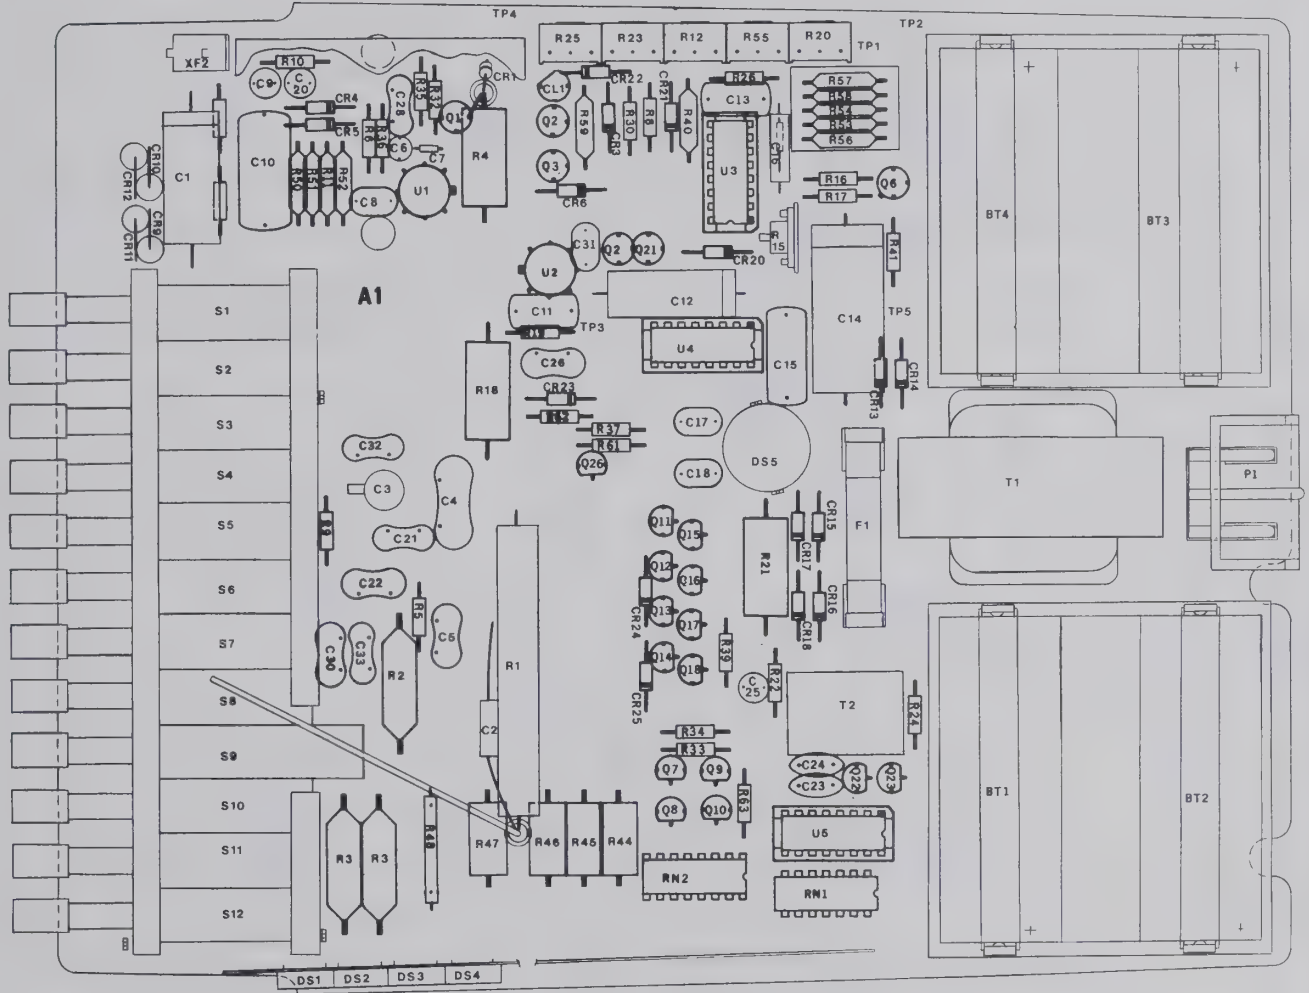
8000A-01 MAIN PCB ASSEMBLY
